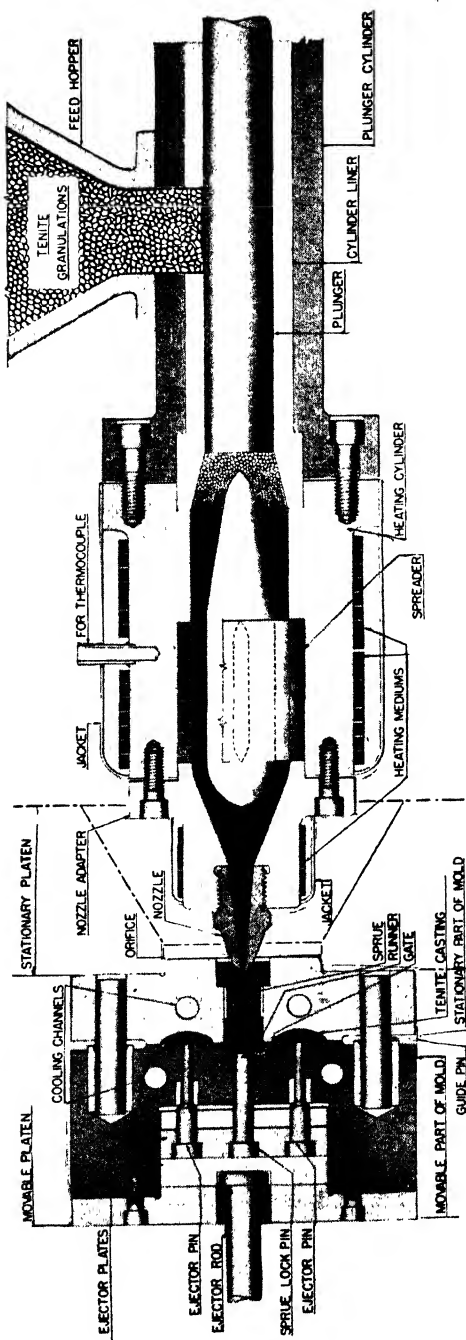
A typical mold (die) and heating chamber (for a thermoplastic). The balance of the injection molding machine includes pressure means on the one side for closing and holding the mold, and on the other, for forcing a heated charge into the mold, together with adjusting and cycle control means. (Courtesy Tennessee Eastman Corp.)
